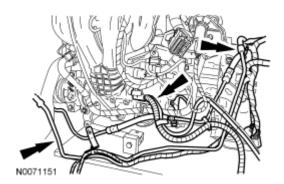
Locating Power Steering Tubes And Wiring Harness Courtesy of FORD MOTOR CO.
